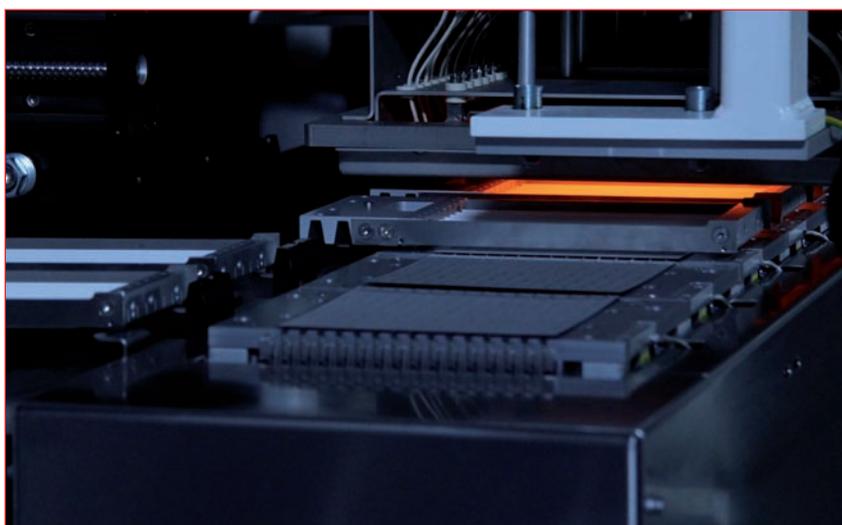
Multi-busbar connector: cell vacuum chucks and the IR soldering unit for the soldering process.
